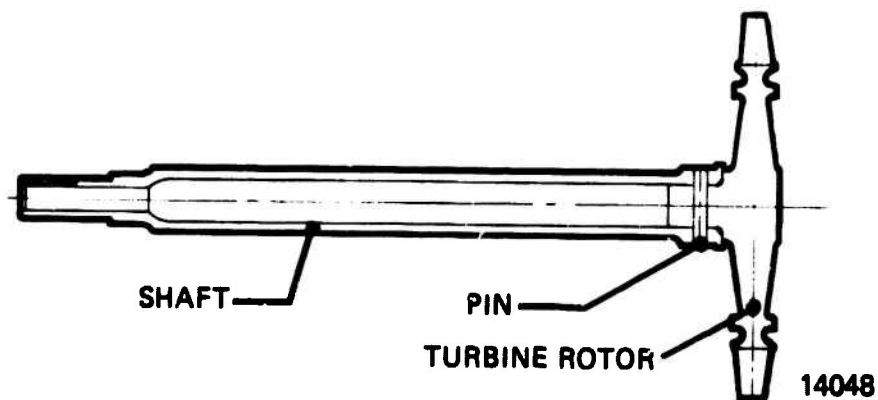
JFS206 Alternate Power Turbine Rotor and Shaft Construction.
